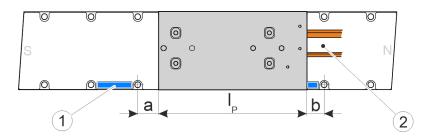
Measuring of the relative position of the primary to the secondary part (arrangement B)
